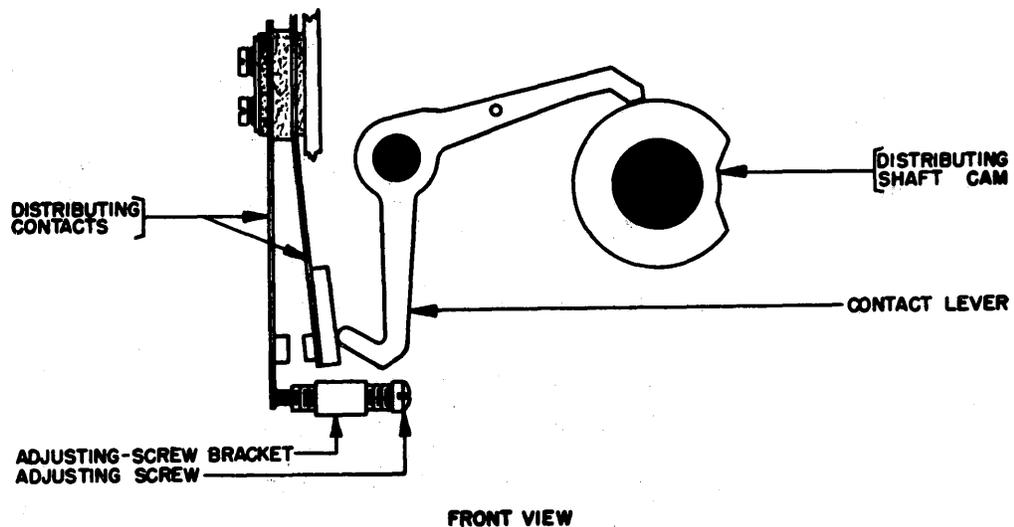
Distributor Cam Assembly - Reperforator-Transmitter
